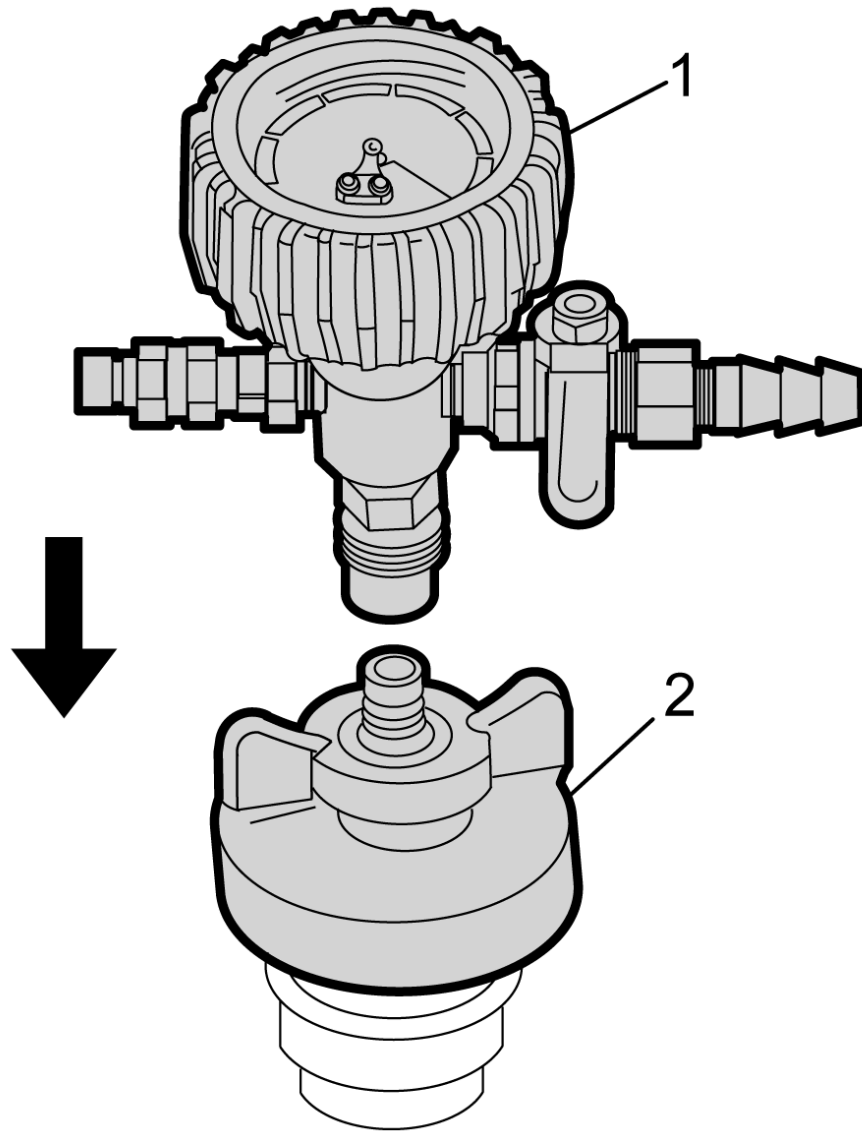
Vacuum Gauge Assembly & Vac N Fill Cap
